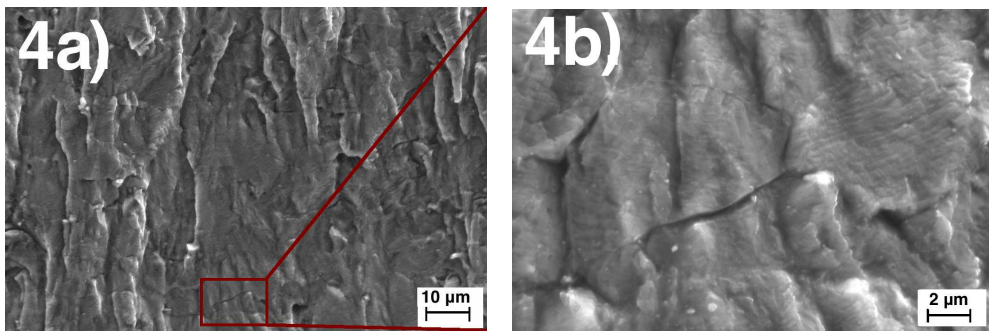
Transgranular cracks and striations of AA6082.50-T6 as welded.
